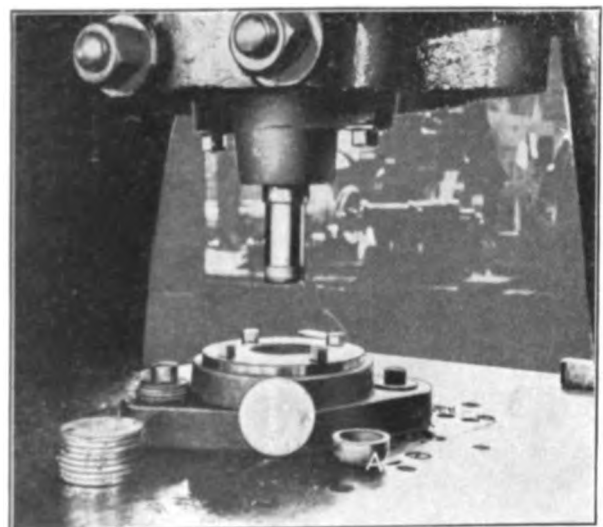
CUTTING PUNCH AND DIE FOR FIRST BLANKING OPERATION
